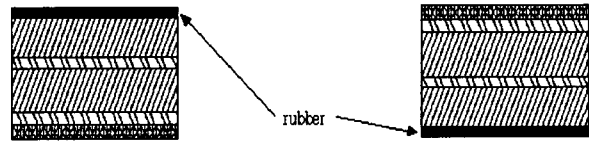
Position of rubber layer in shearing of a workpieces
